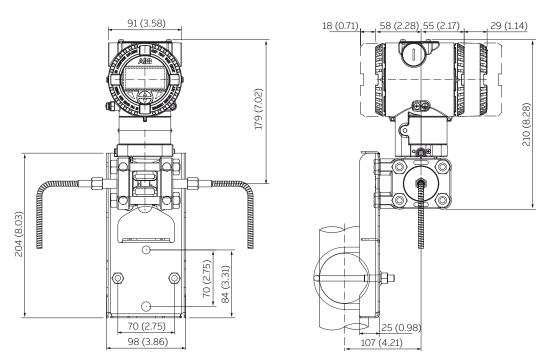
266DRH with barrel housing and remote seal(s) on flat bracket for vertical or horizontal 60 mm. (2 in.) pipe
